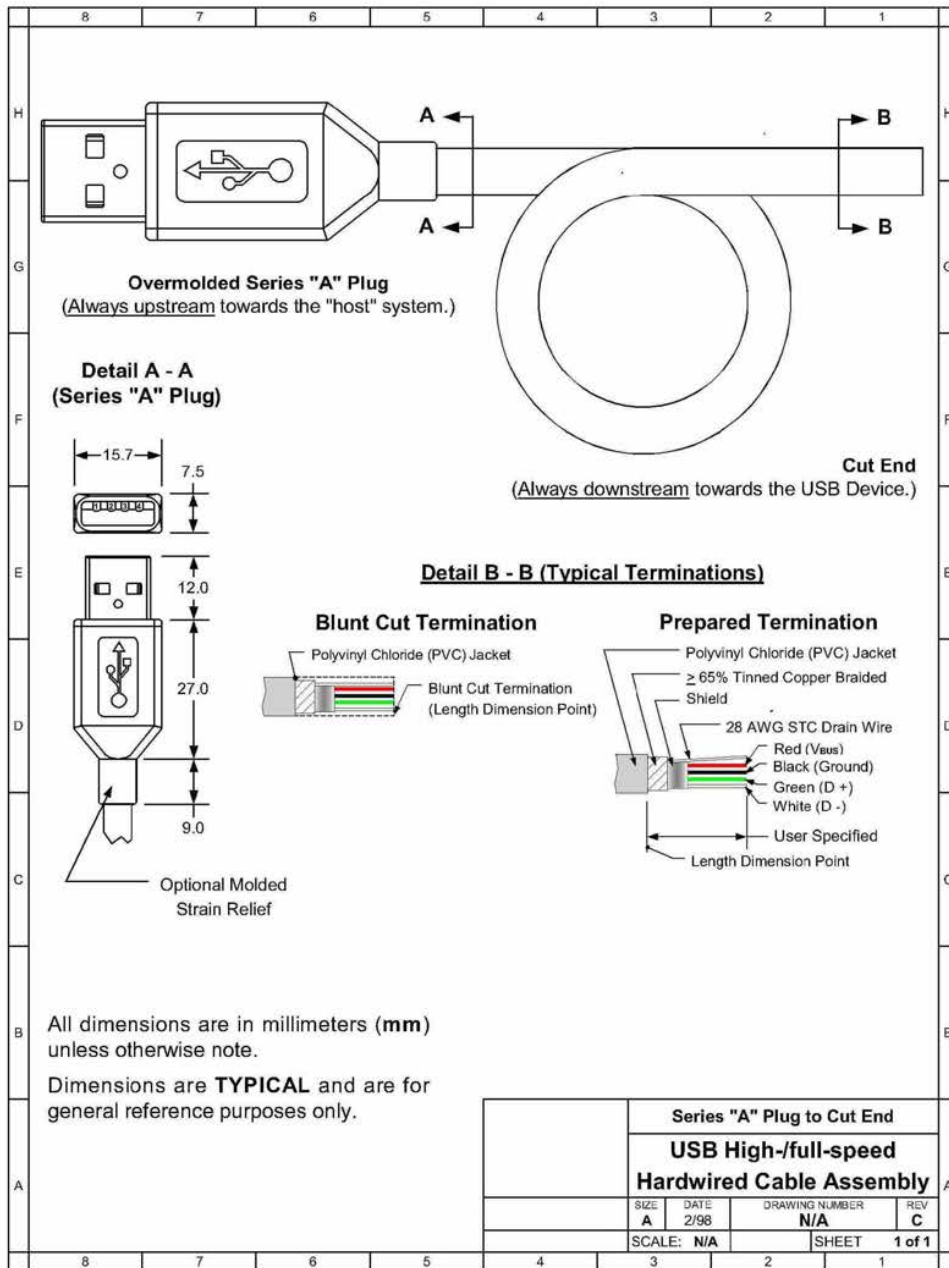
USB High-/full-speed Hardwired Cable Assembly
